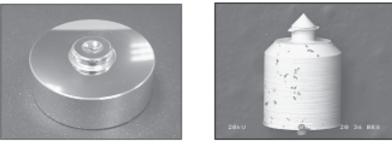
Mirror surface machined in aluminium (shape error <0.08 µm in spherical zone, <0.05 µm in flat zone); Miniature Ø0.75 mm brass part.
